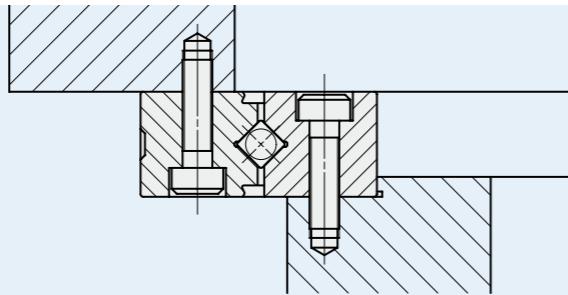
Example of direct mounting to the mating surface of Mounting Holed Type High Rigidity Crossed Roller Bearing
